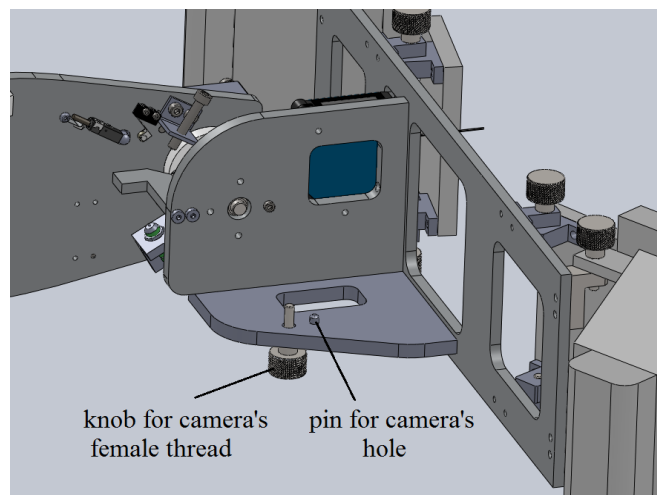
Mounting fixture on robotic scanner for transient thermography camera
